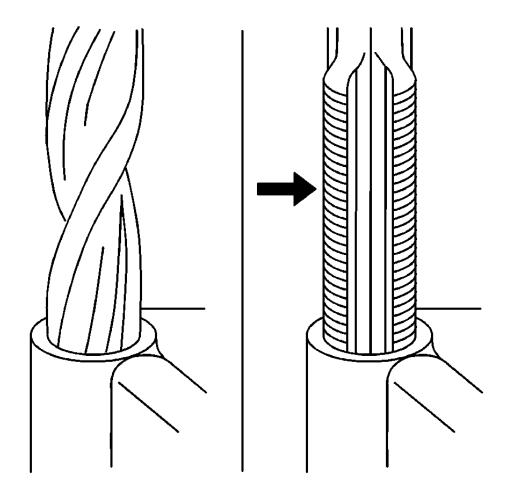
Drilling & Tapping Damaged Threads Courtesy of GENERAL MOTORS CORP.
